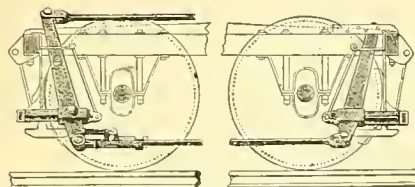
Application of the Q. & C. Automatic Brake Adjuster.
